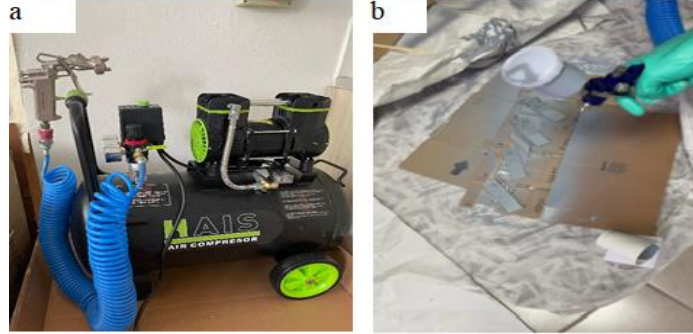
Obtaining samples by spraying. a) air compressor, b) spray gun.
